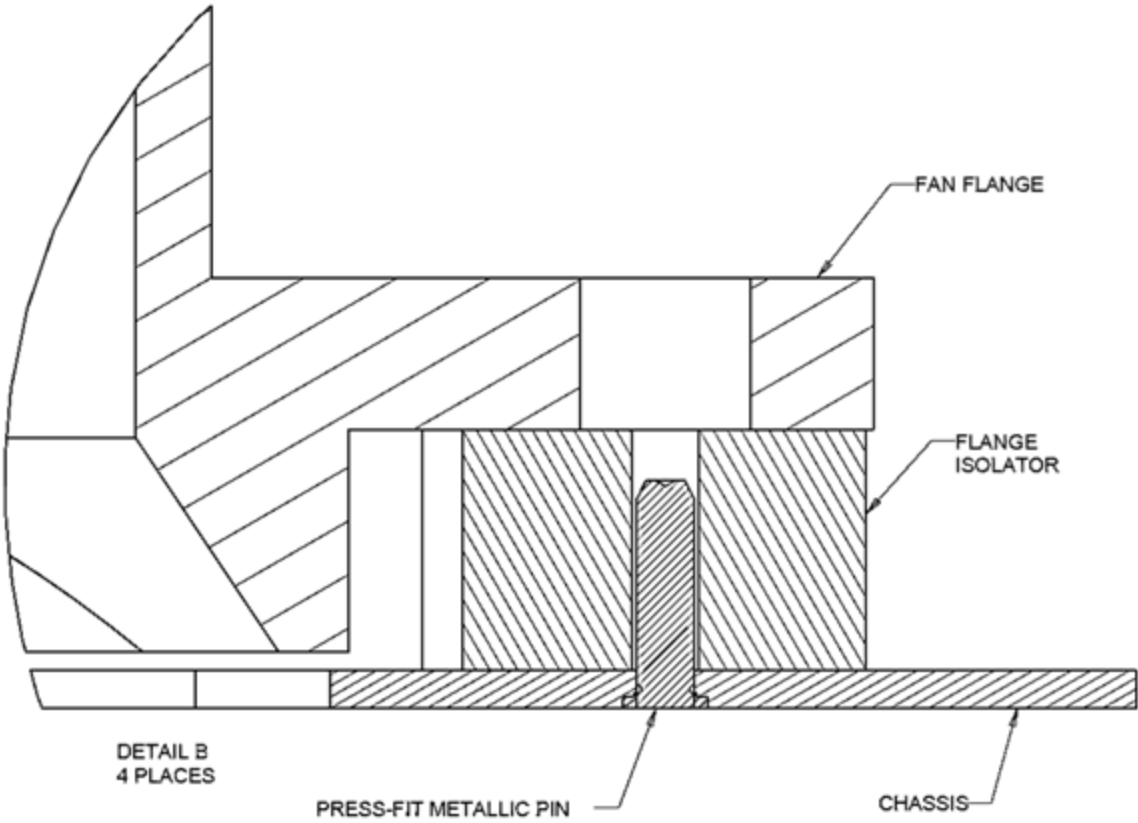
GEN1B and GEN2B Flange Isolator Cross-Section
